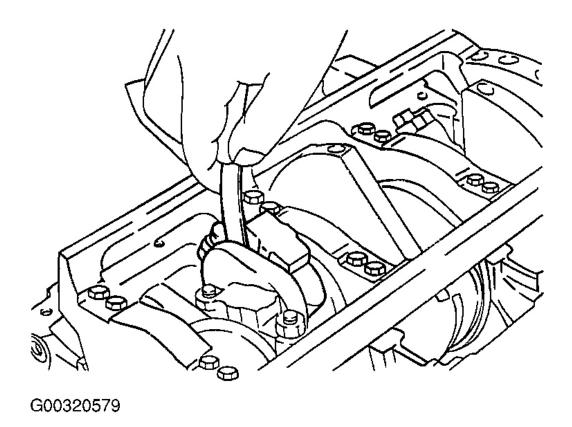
Measuring Crankshaft End Play Courtesy of KIA MOTORS AMERICA, INC.
